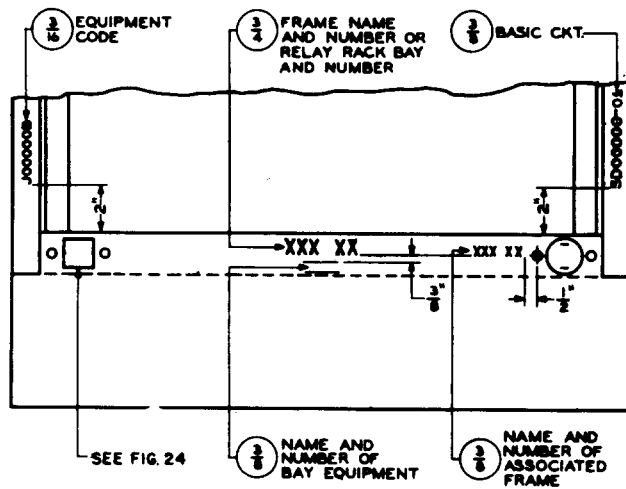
Front View of Single-bay, Box-type Frame Base
